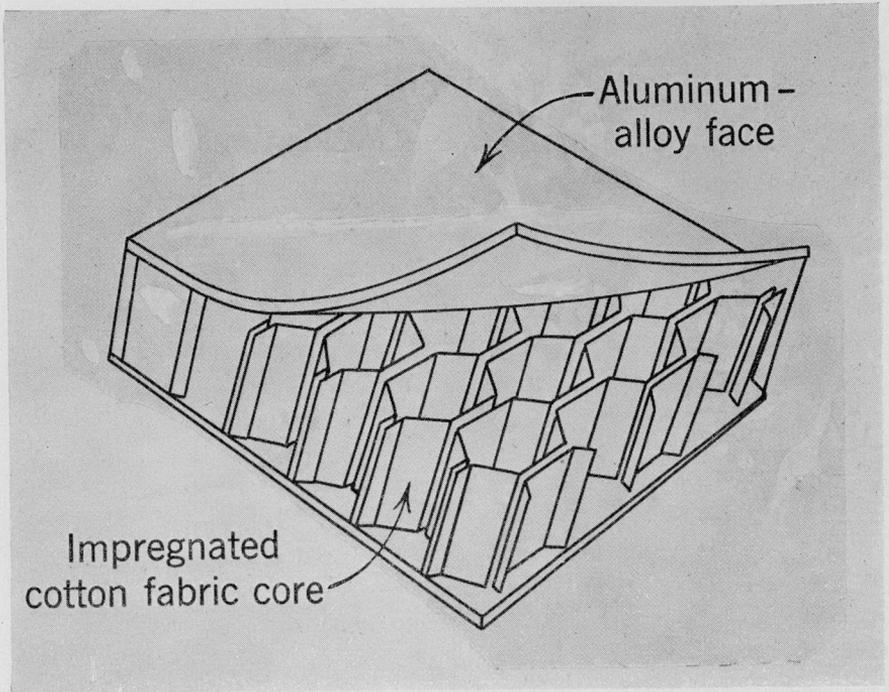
SANDWICH PANEL SHOWING ARRANGEMENT OF HONEYCOMB CORE.
